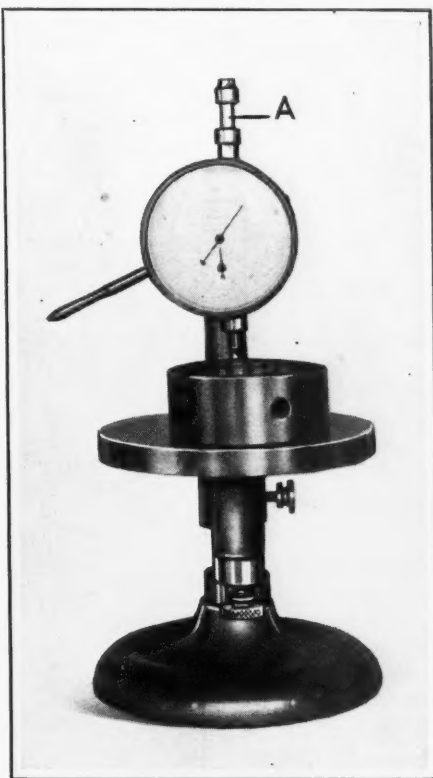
Gaging the Location of the Spindle Hole in the Dial Case
